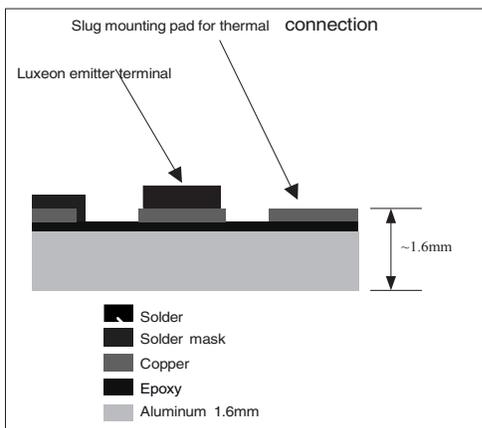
Cross Section of a Typical Metal (Al)-Core PCB at the Solder Pad Location.
